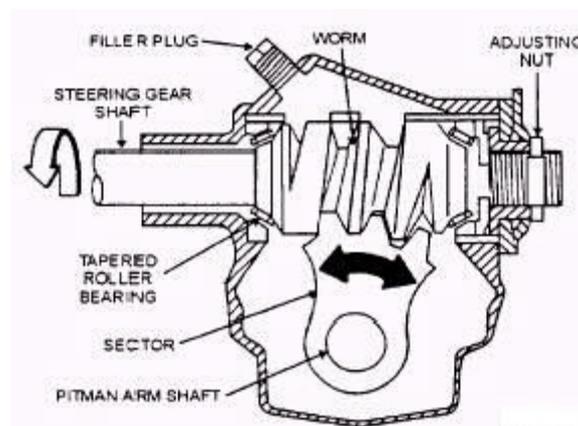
Worm and sector steering gear system (<http://www.tpub.com/basae/213.htm>)
